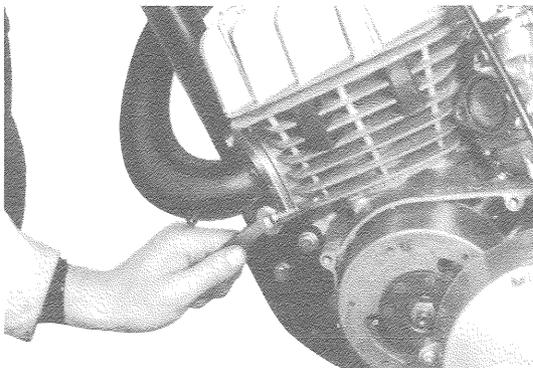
Unscrewing exhaust pipe fitting bolt
